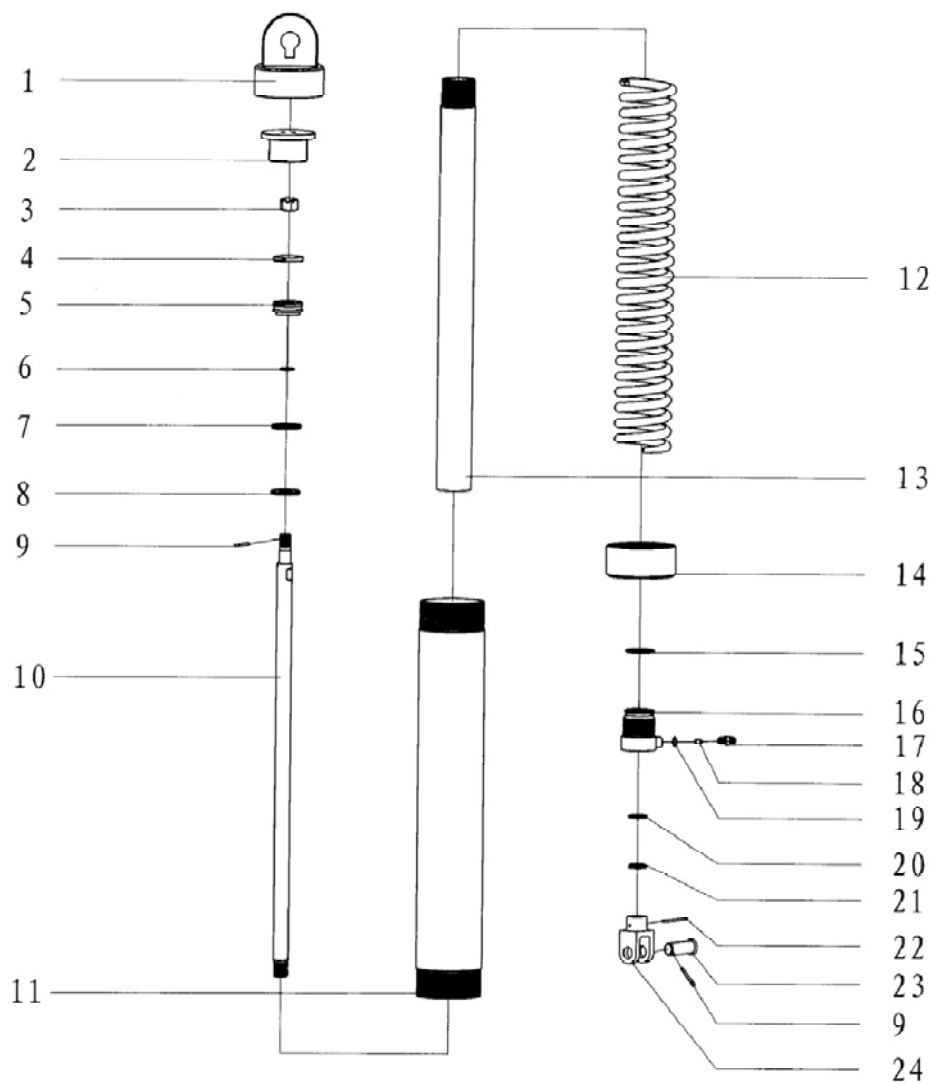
Hydraulic spring suspending device (KHT9625-52)
